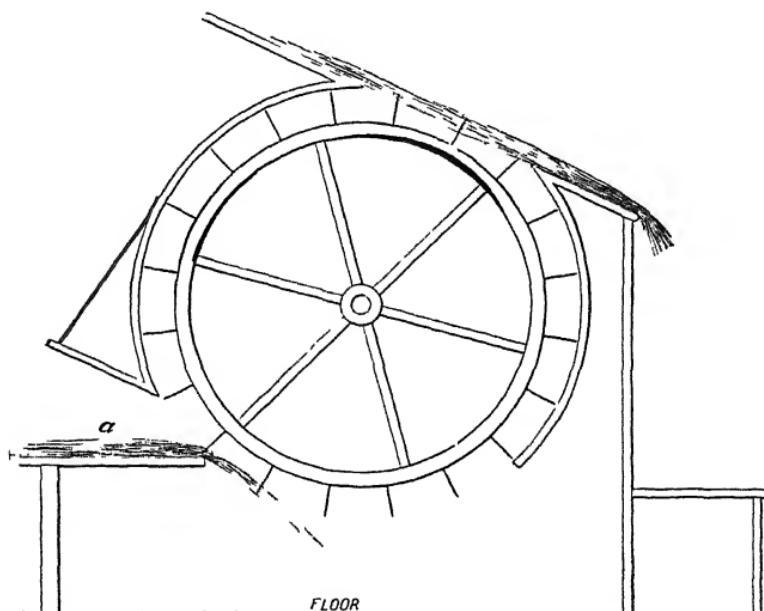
HEMP SCUTCH OR COMBING MACHINE
